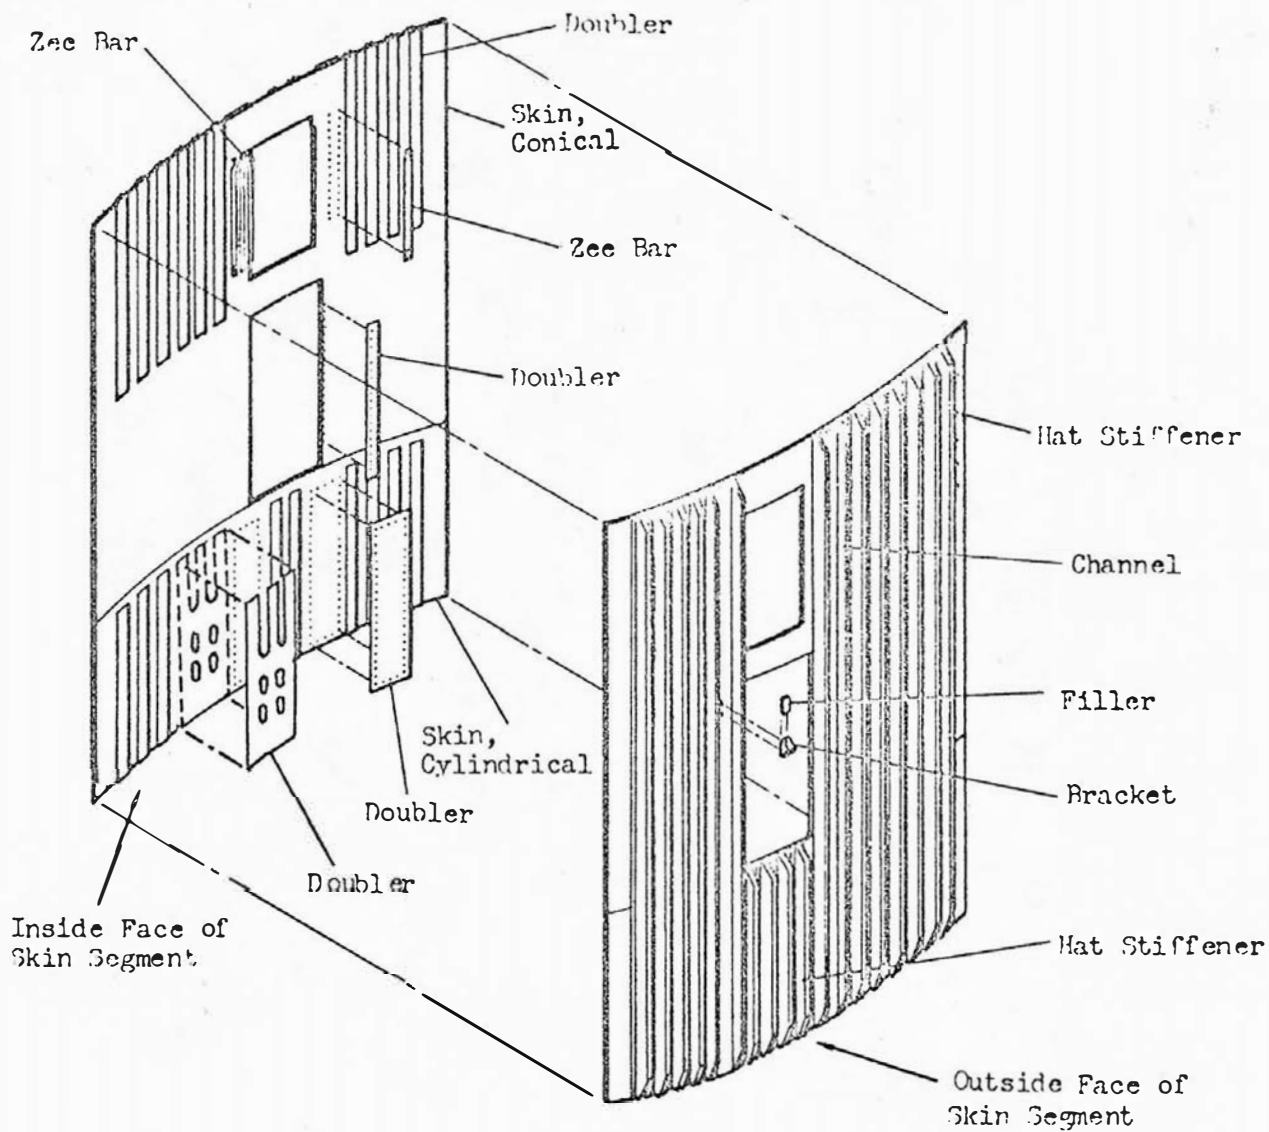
Skin Segment Assembly (Umbilical and Access Door)
